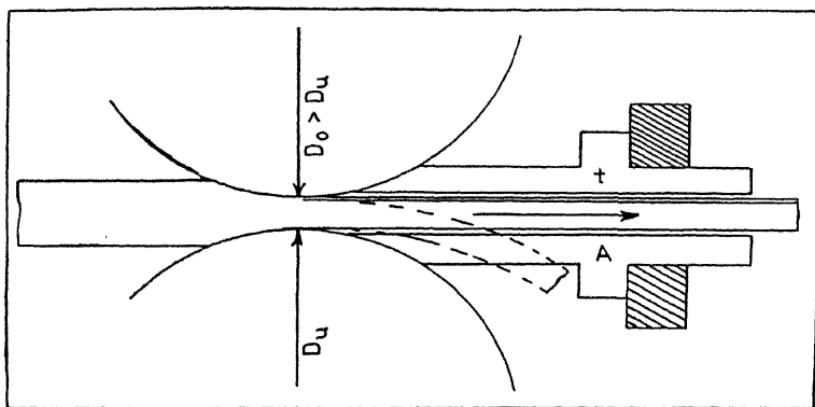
Type of Stripper Guide Used to Afford a Perpendicular Deliverance of the Piece from the Rolls
